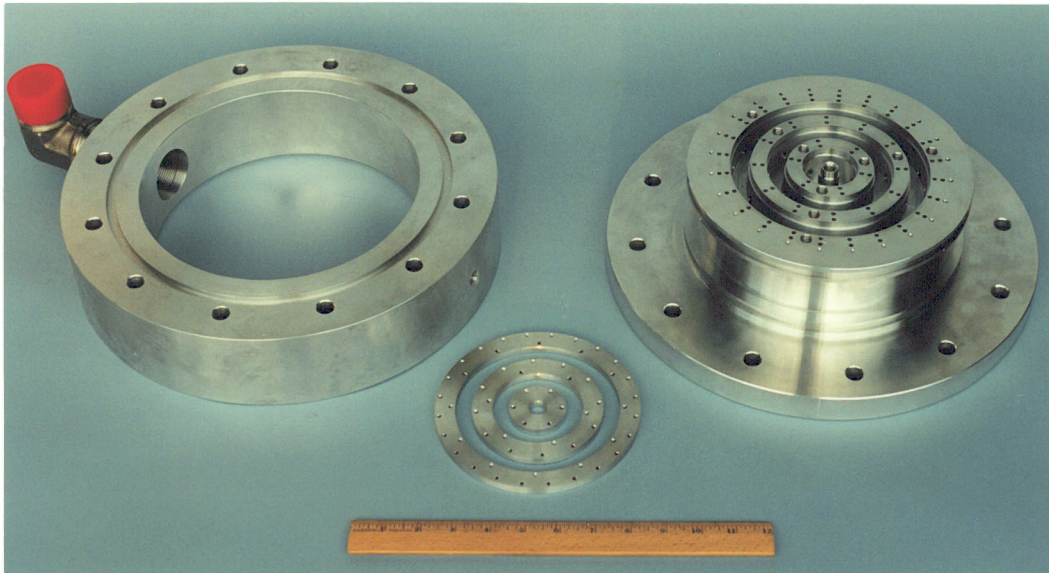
Completed components of the flat face injector. The fuel manifold ring (left), the face rings, and the injector body (right) are shown here.
